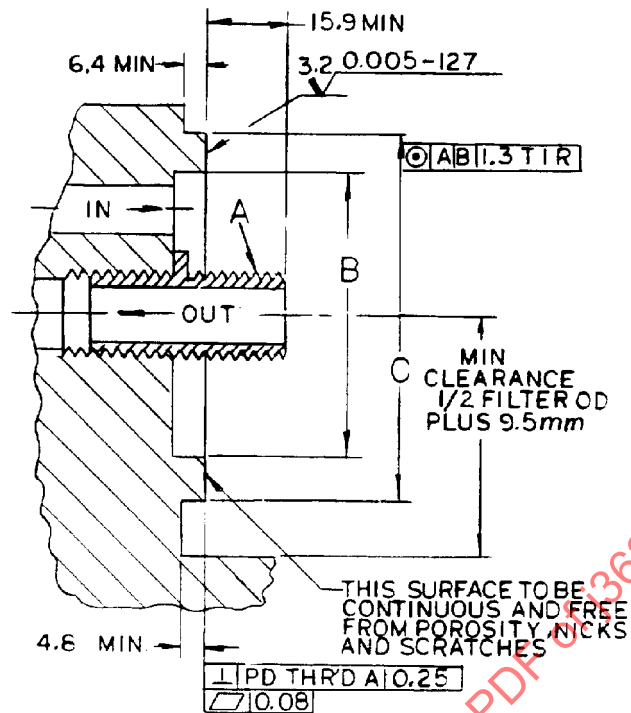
LUBRICATING OIL SPIN-ON FILTER-BASE MOUNTING
